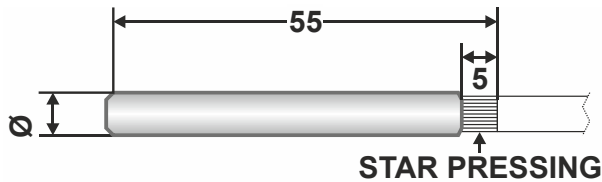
Dimensions of the cable-type bulb sensor in mm
